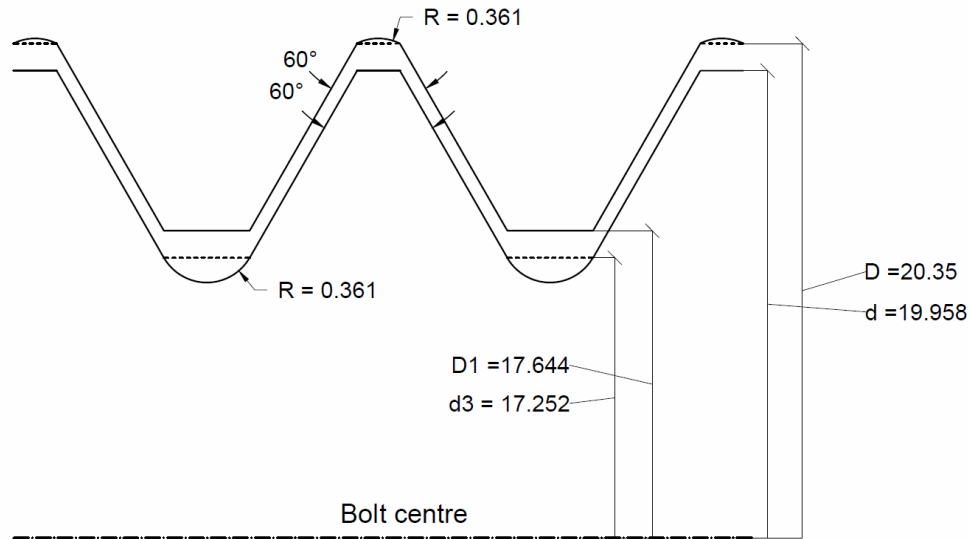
Nominal thread dimensions for thread tolerance class combination 6AZ6g
